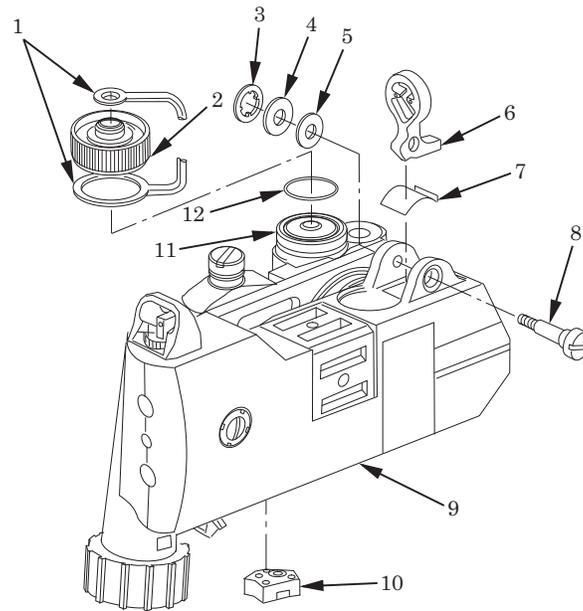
Disassembly/Assembly of Day/Night Sight Assembly.
